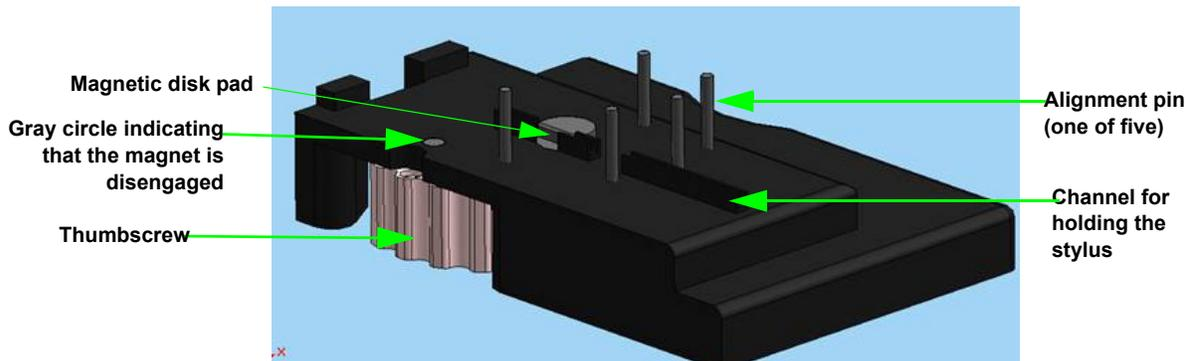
Stylus Exchange Tool with Its Magnet Disengaged
